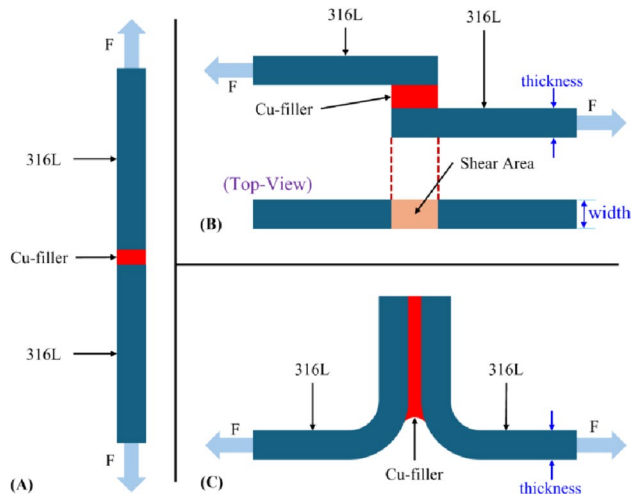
Schematic diagrams of brazed joint test methods: (A) butt-jointed axial tension, (B) lap jointed shear, and (C) peel mode representing Mode-I opening at the fillet
